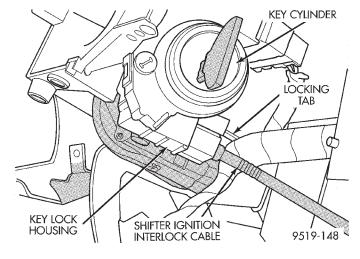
Shifter/Ignition Cable At Lock Cylinder
